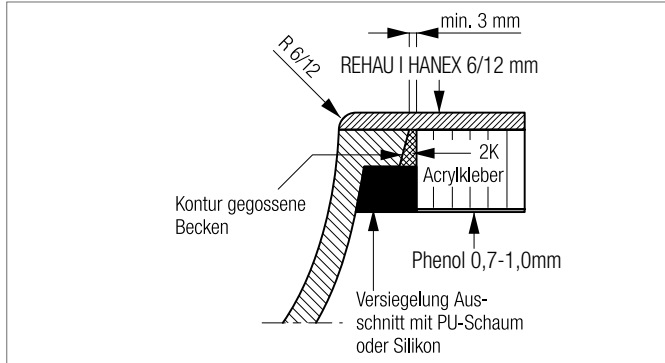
Radius R6 for boards 6 mm / R12 for boards 12 mm
